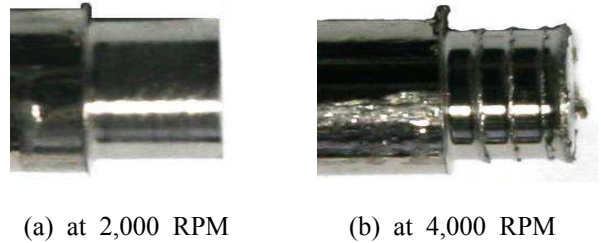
Appearances of $Zr_{50}Cu_{40}Al_{10}$ BMG specimens machined using a CBN tool (Cutting depth is 0.3 mm at all conditions)
